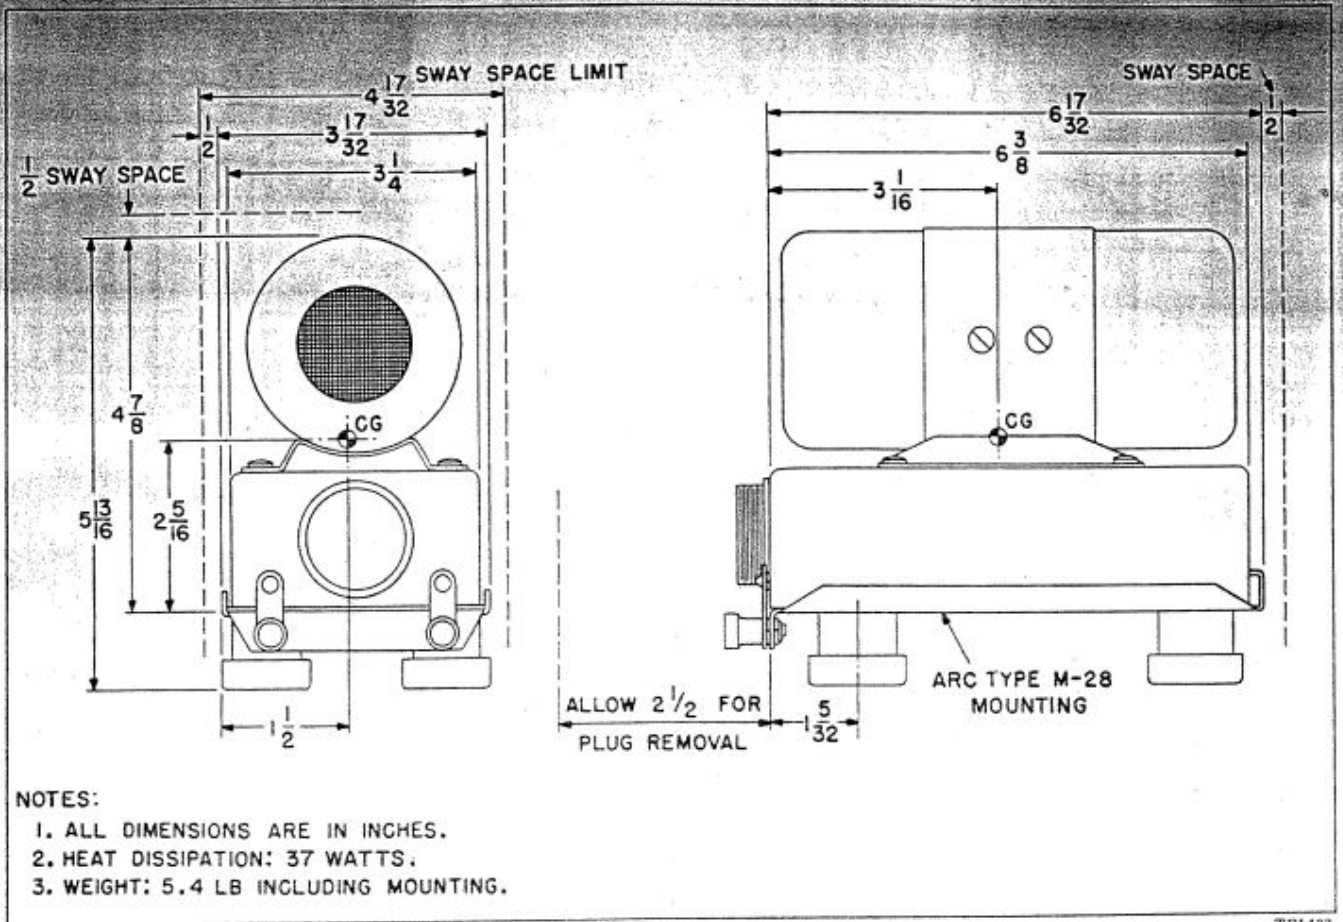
ARC Type P-14A Power Unit with ARC Type M-28 Mounting, Outline Dimensions
